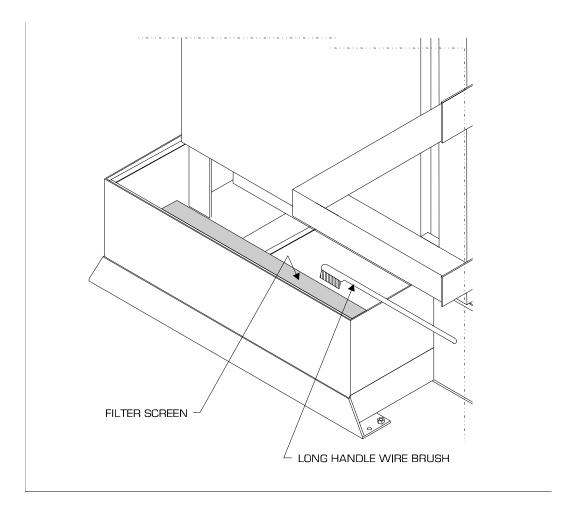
2: Cleaning the Pump Intake Filter Box
